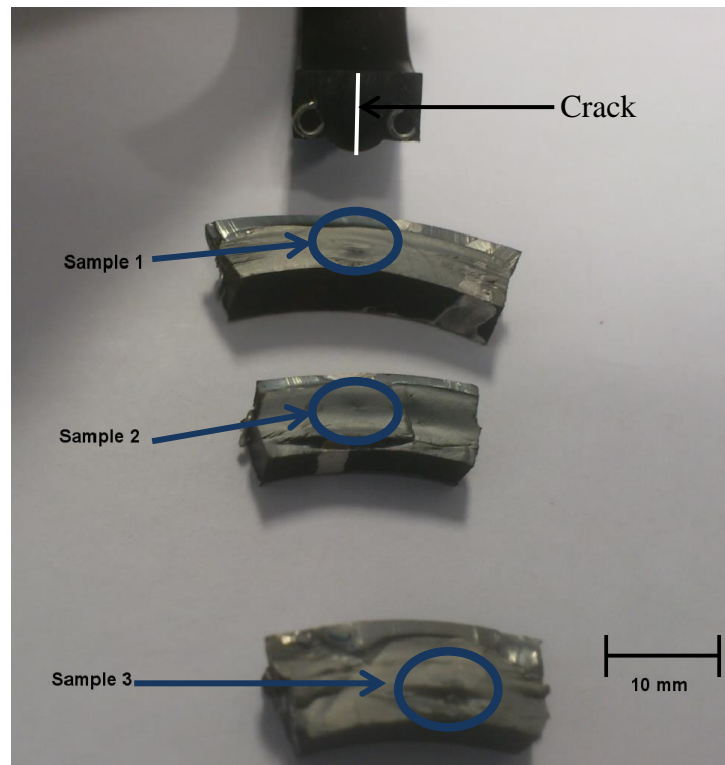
Fractured spring seals showing the location of three sections containing crack initiation and crack propagation regions.
